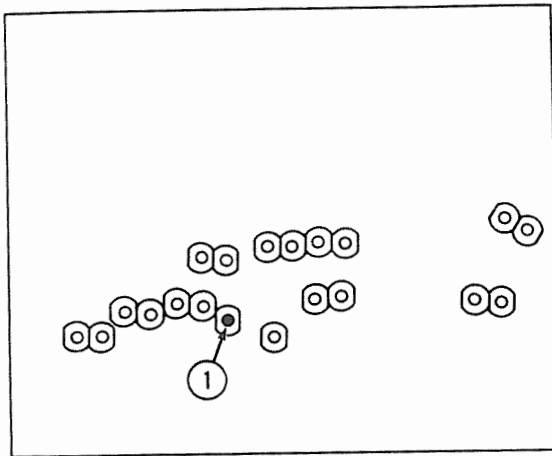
(Sheet 1 of 5 Sheets). Automatic Pilot Control System — Key Drawing
